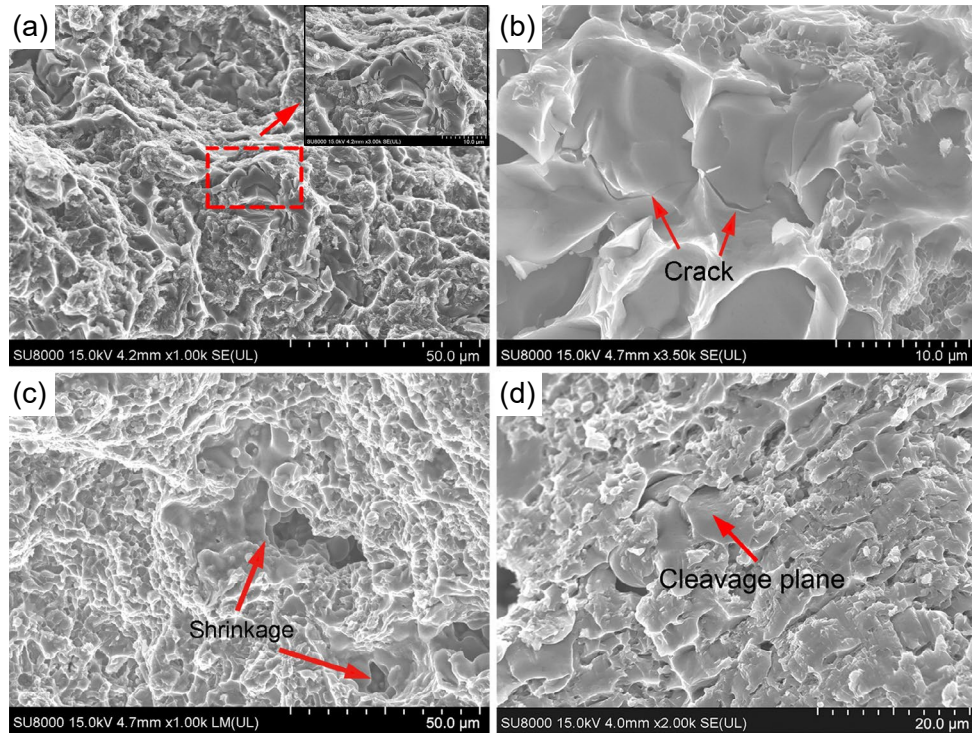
Fracture morphology in die-casting state: (a, b) Position 1; (c, d) Position 4
